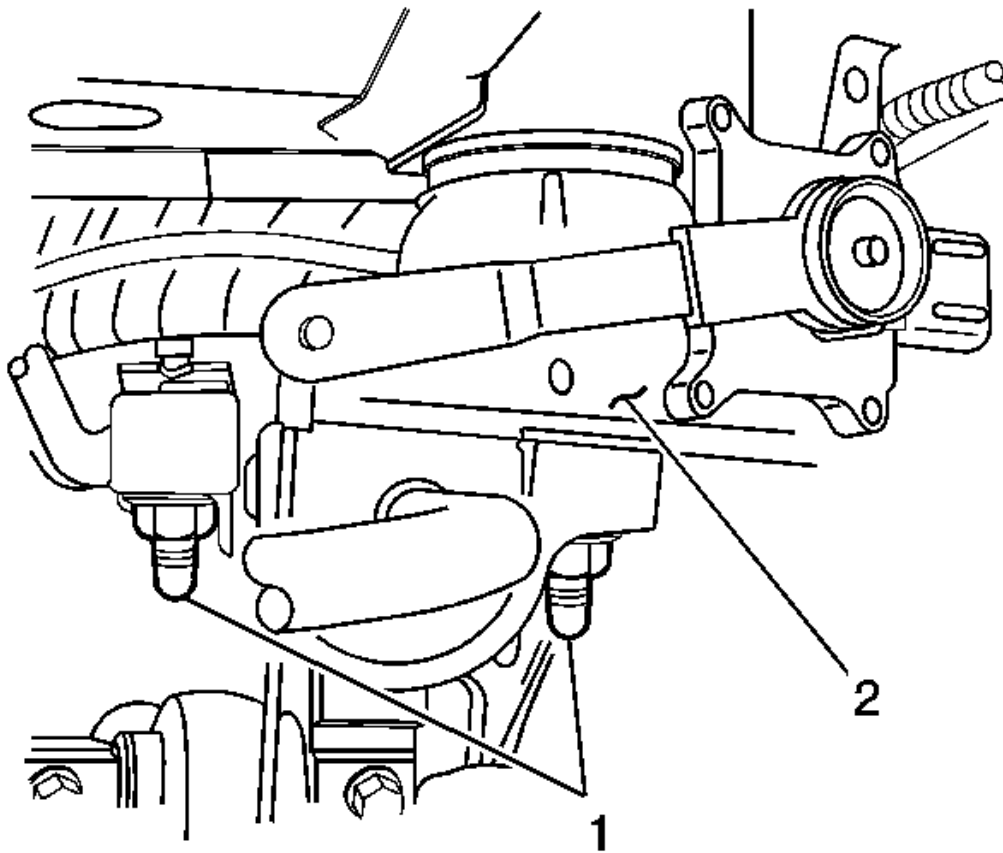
Identifying Automatic Level Control Height Sensor Bracket Bolts
